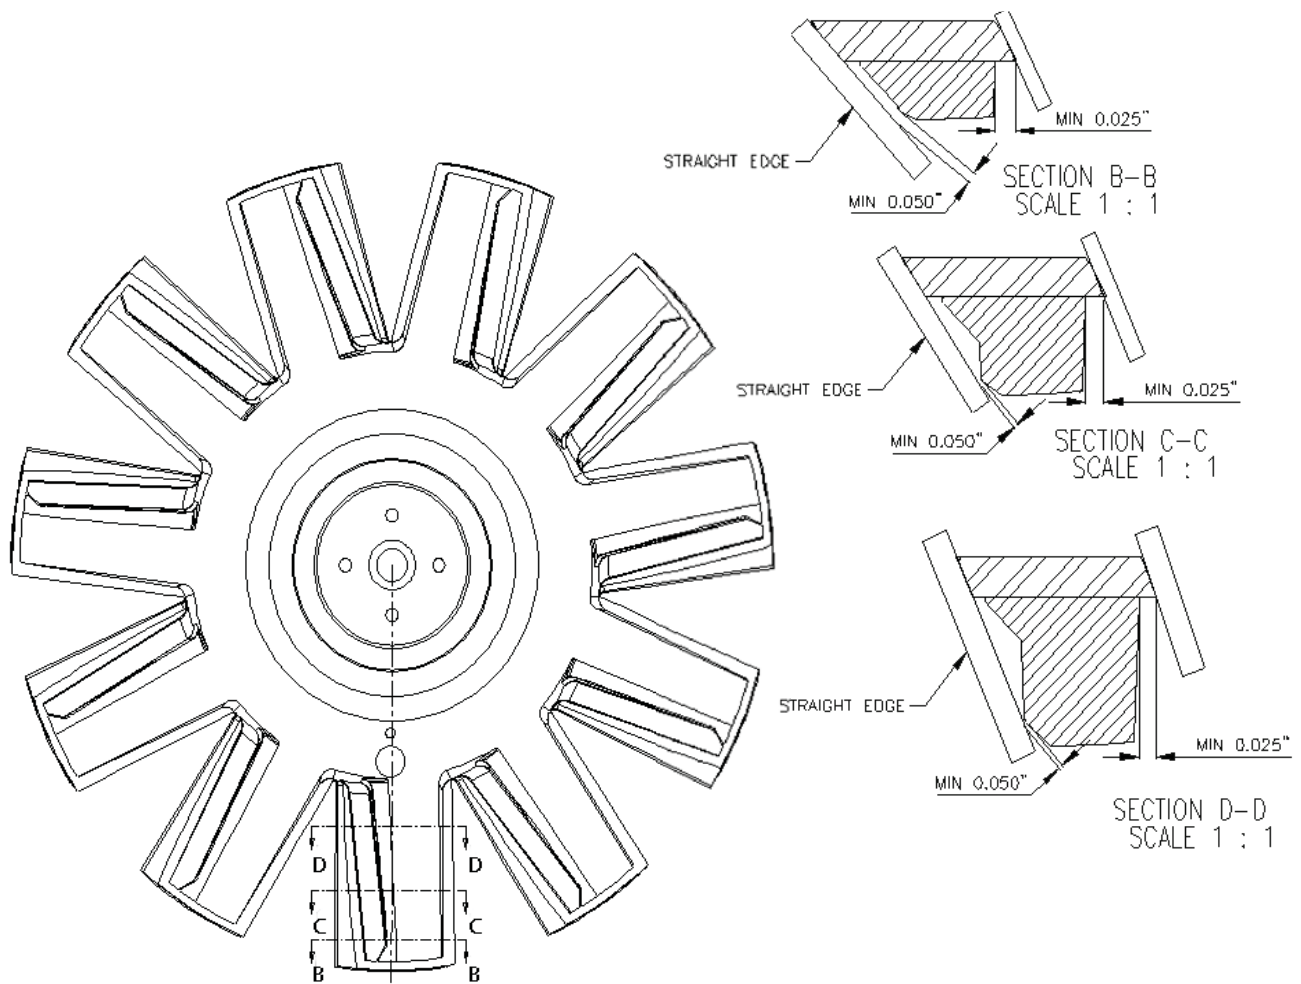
Gate Rotor and Support Clearance - Minimum Clearances
